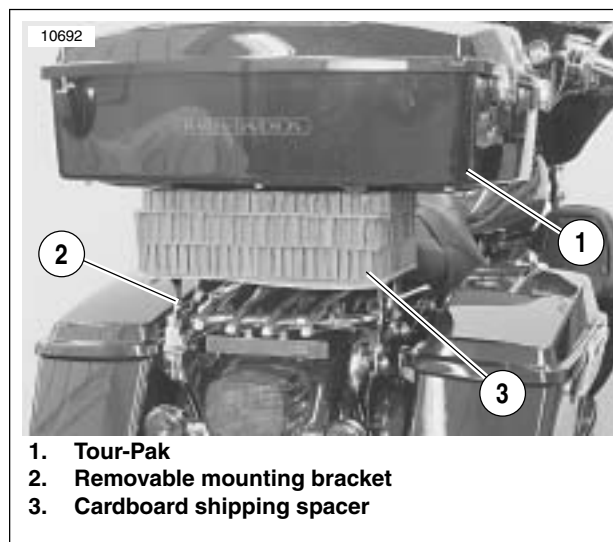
Tour-Pak Mounting Assembly as Shipped
